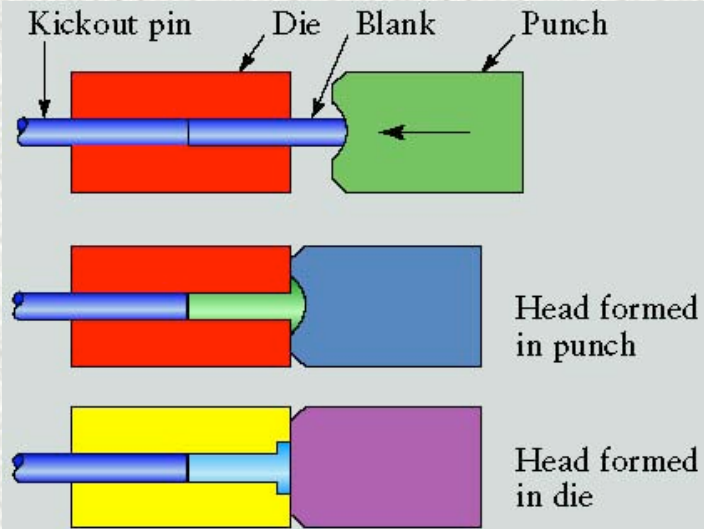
Forging heads on fasteners such as bolts and rivets. These processes are called *heading*.
